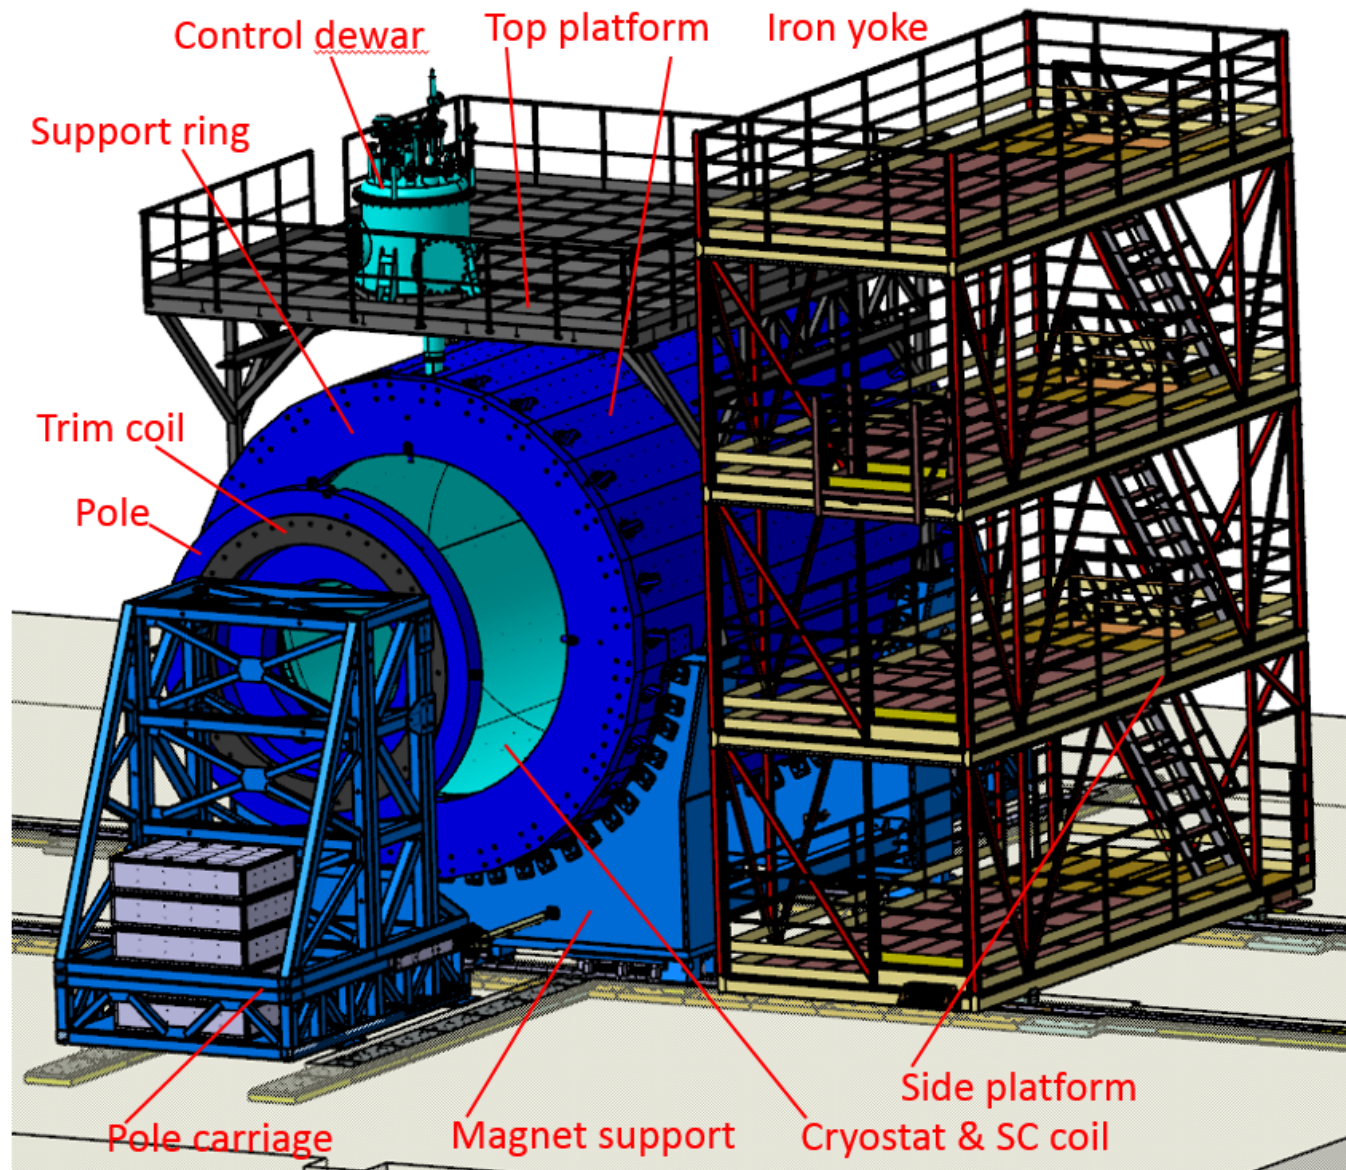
Magnet with the attached platform for electronics and equipment
